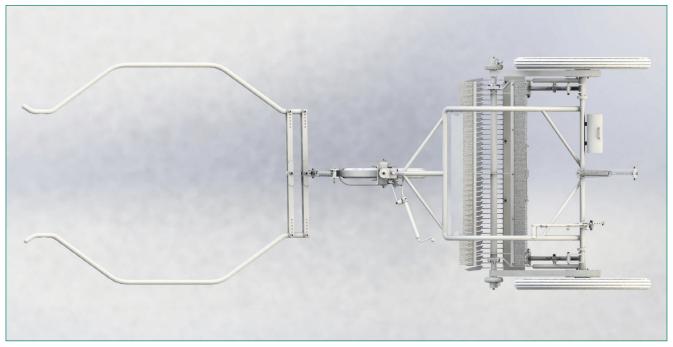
Top view of the horse drawn CombCut coupled to the forecart
